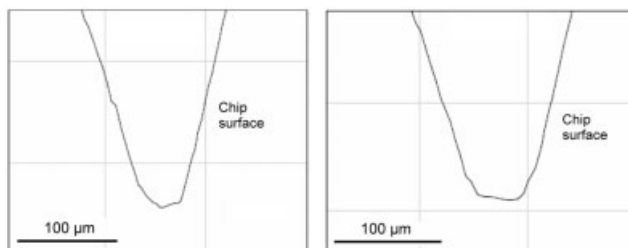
Shape of a cutting edge after 120 m and after 600 m cutting length. The shapes are not shown in cutting direction due to measurement limits.
